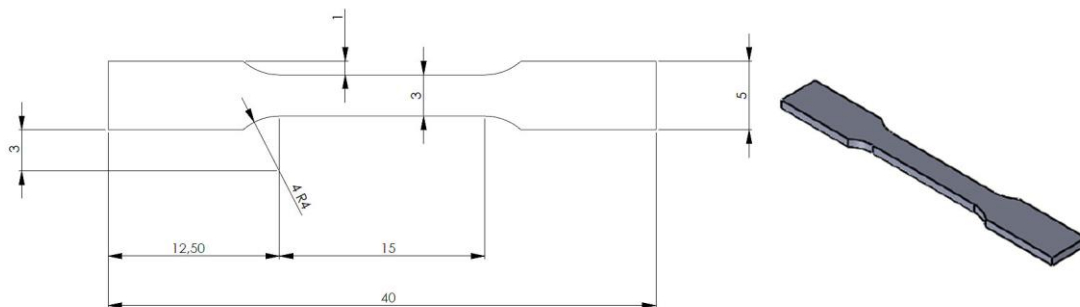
The gauged dimensions of the specimens for tensile test (*Bertrand 2011*).
